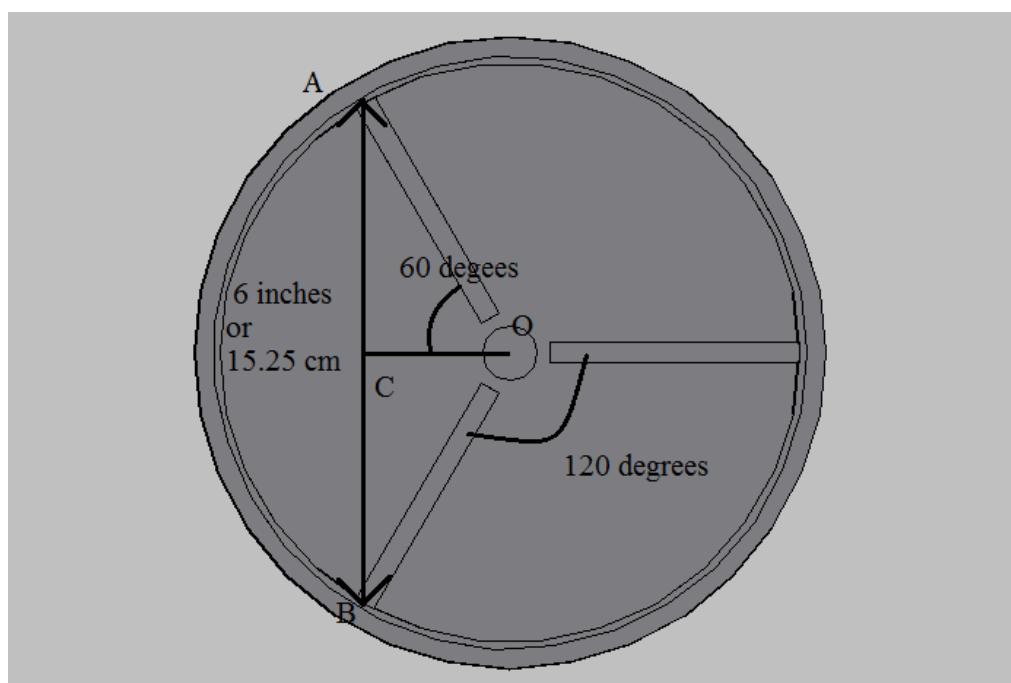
Top View showing the dimensions (cm = centimeters)
